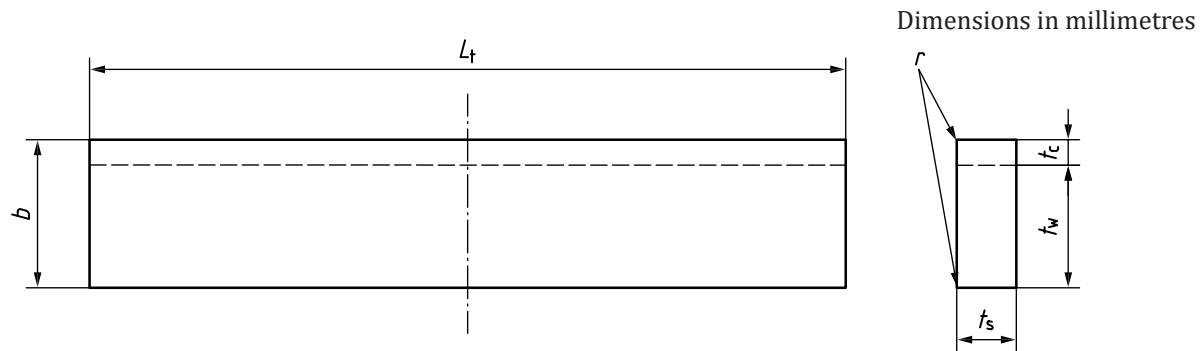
Face bend test specimen for cladding without a butt weld (FBC)
